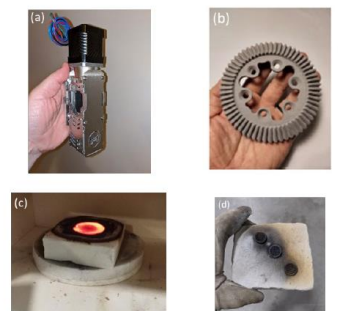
Photographs showing (a) the pellet extrusion print head, (b) a green part produced by M3D's extrusion process, (c) a heated part during microwave sintering, and (d) sintered parts embedded in susceptor material prior to cleaning.
